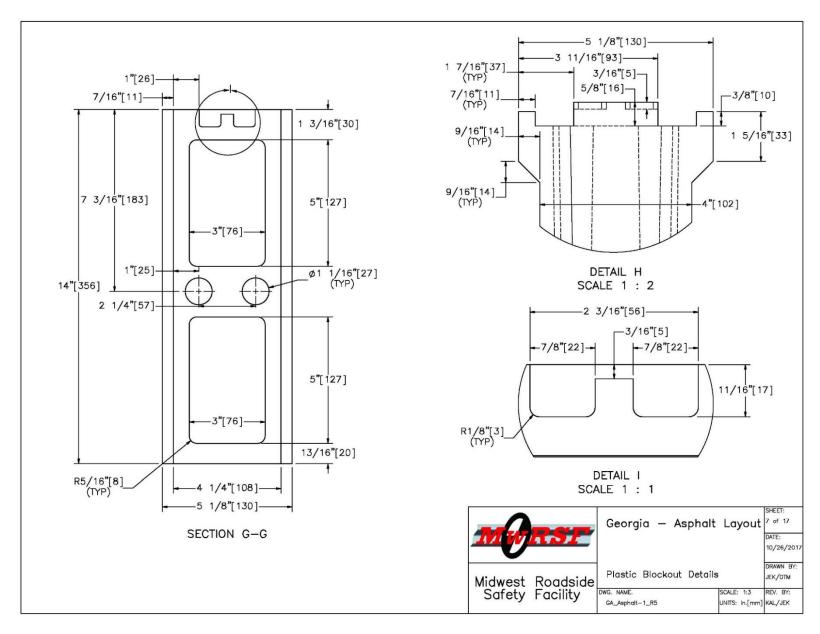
Additional Plastic Blockout Details, Test No. GAA-1
